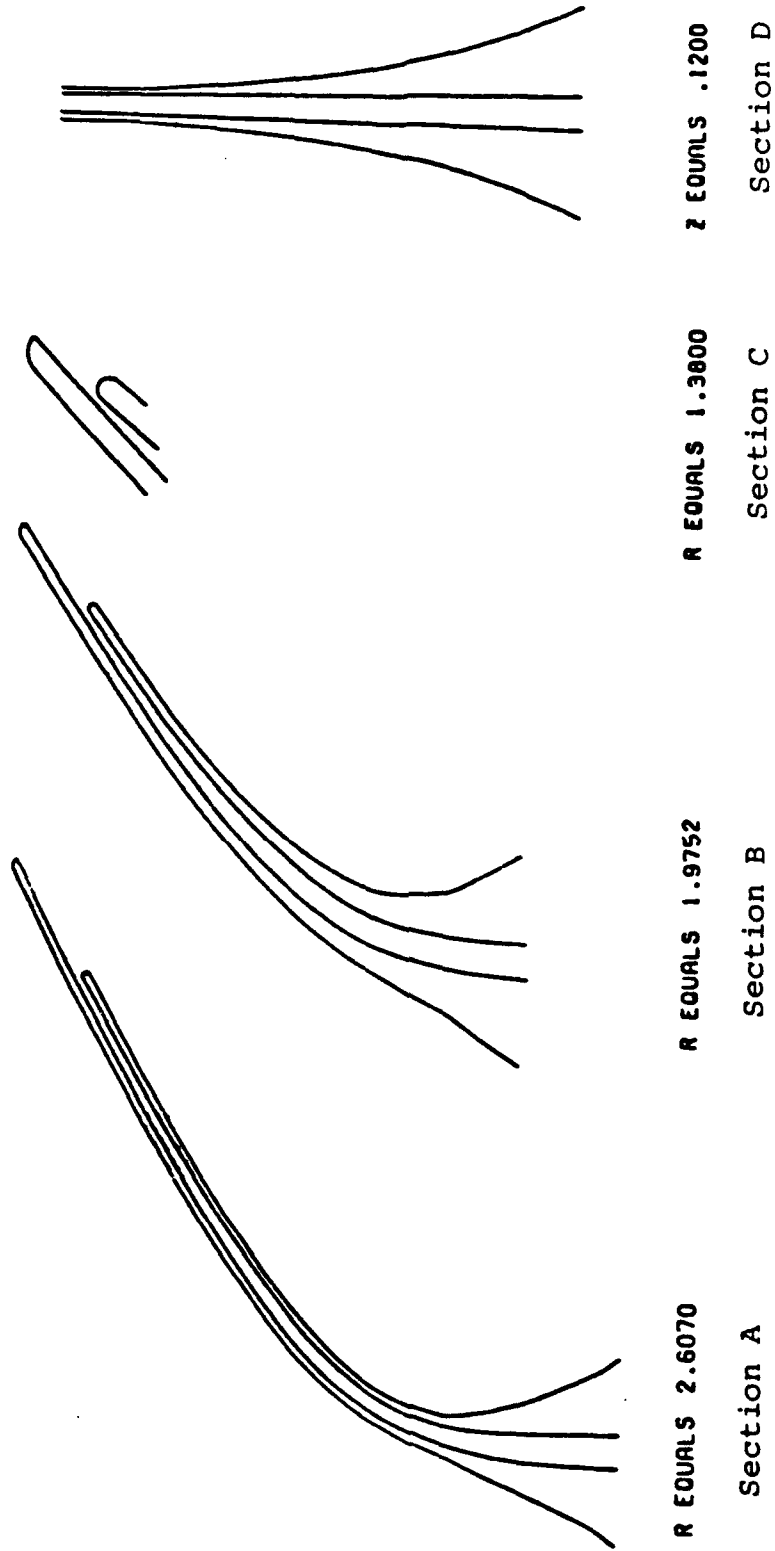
ROTOR BLADE SECTIONS
